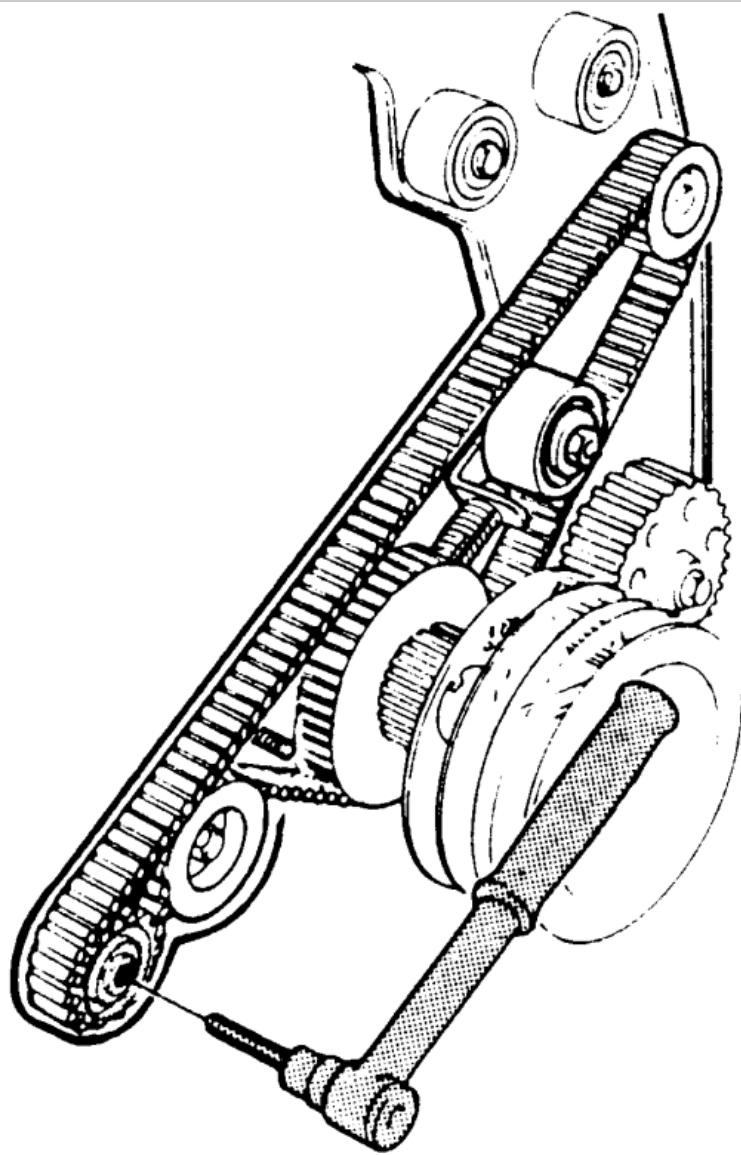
Remove the tensioner pulley to remove the balance shaft
